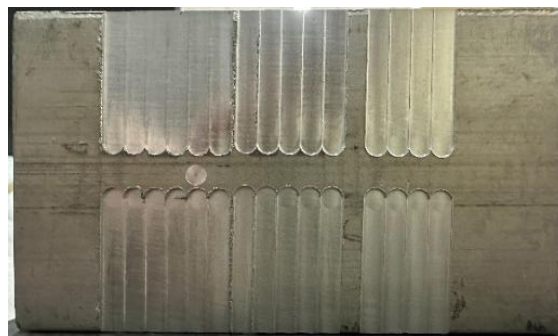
Surface Morphology of SiCp/Al Specimens after Face Milling
